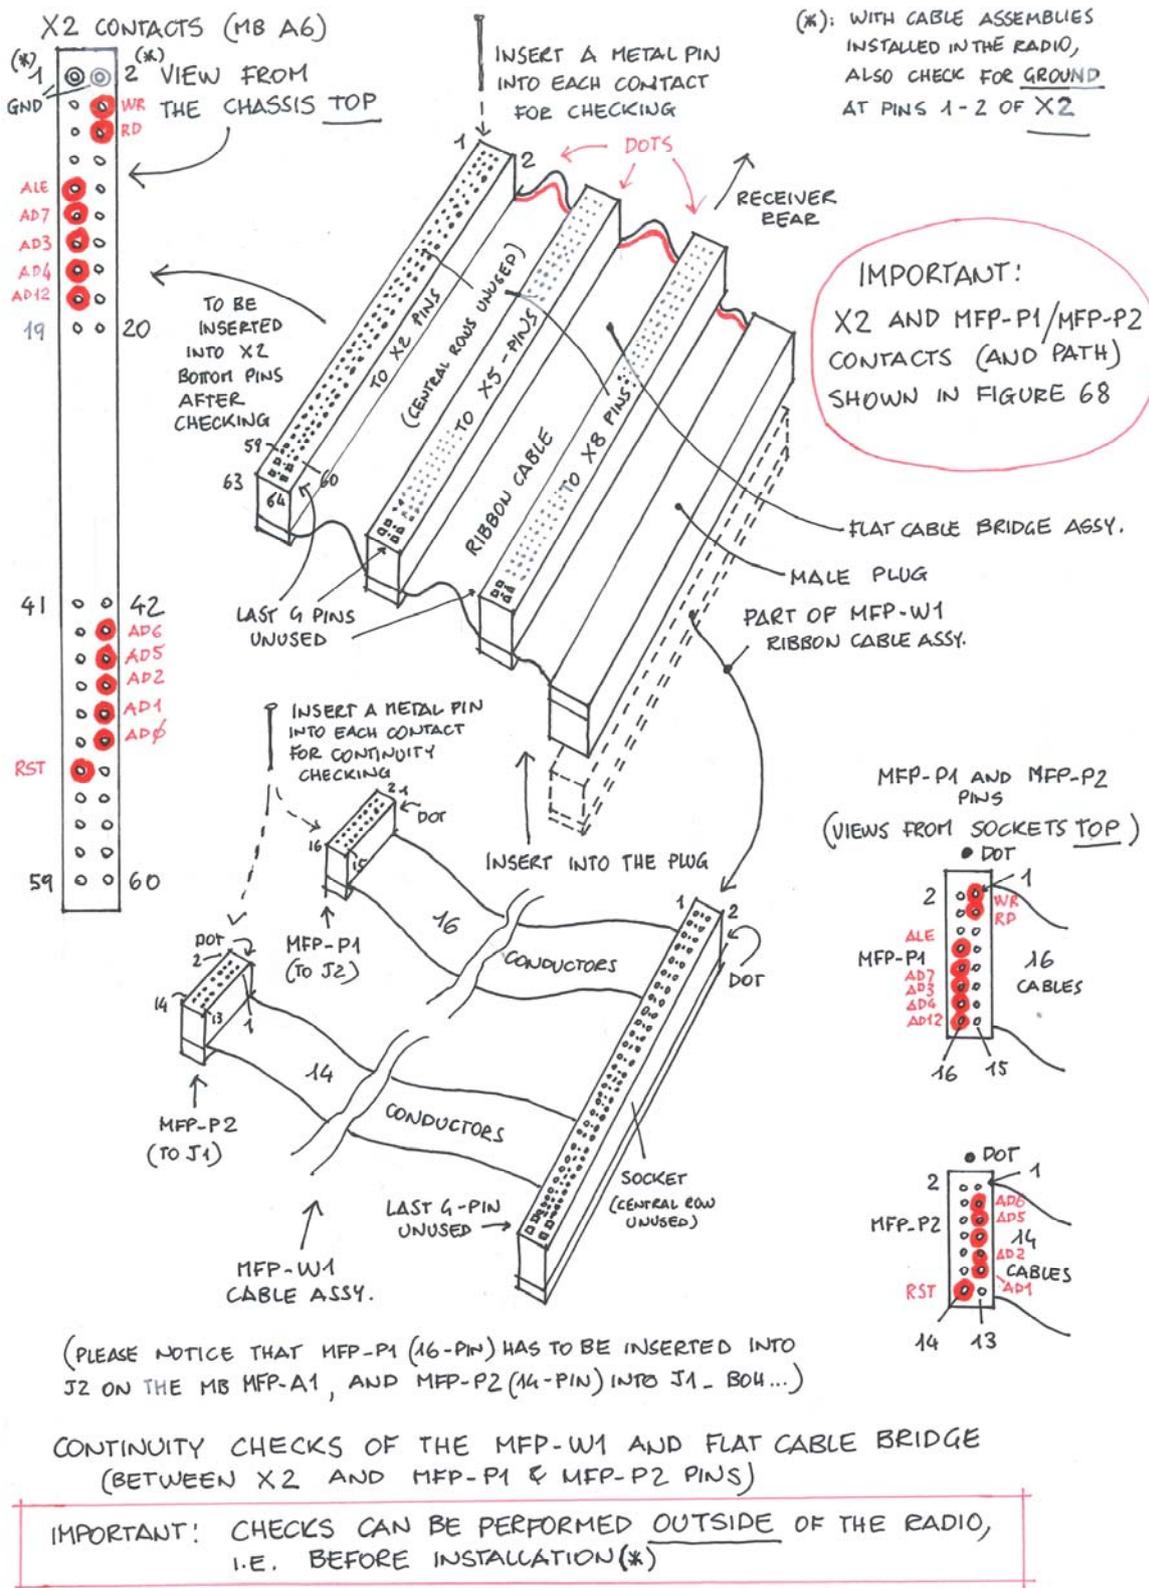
Quick check of the MFP-W1 and ribbon cable bridge assemblies; both must be connected together. This test can be performed outside of the receiver, before installation.
